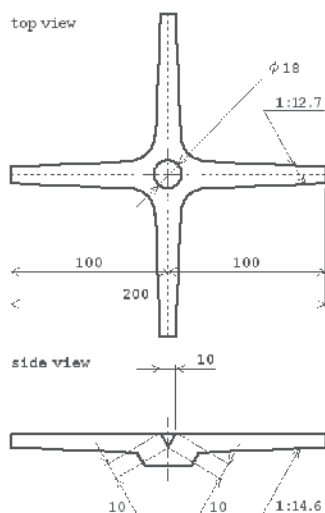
Structure and dimensions (in mm) of the impeller used.
